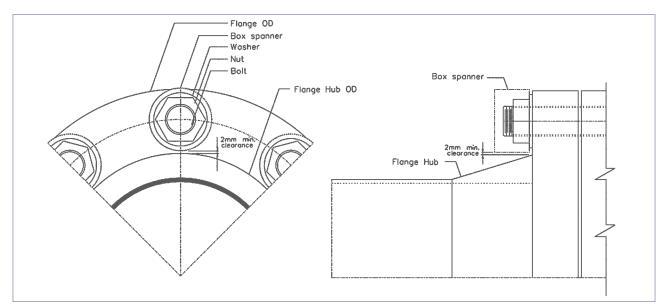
Minimum required clearance between flange hub and box spanner (while tightening the flange assembly)
